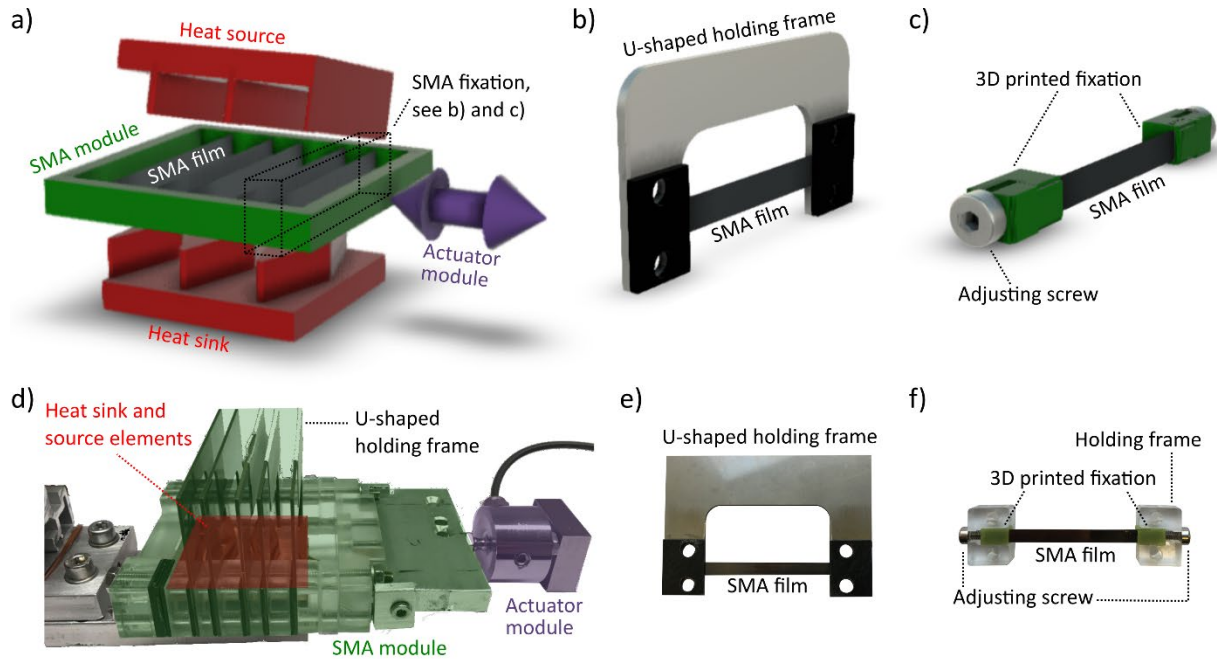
(a) 3D schematic layout showing the major components of the demonstrators: SMA module consisting of SMA films and holding frame, heat sink and source elements and the actuator module; (b) 3D schematic of the U-shaped holding frame used to bond the SMA films in demonstrator 1; (c) 3D schematic of the 3D printed fixations used to bond the SMA films in demonstrator 2; (d) built demonstrator 1; (e) built U-shaped holding frame (demonstrator 1); (f) built 3D printed fixations (demonstrator 2).
